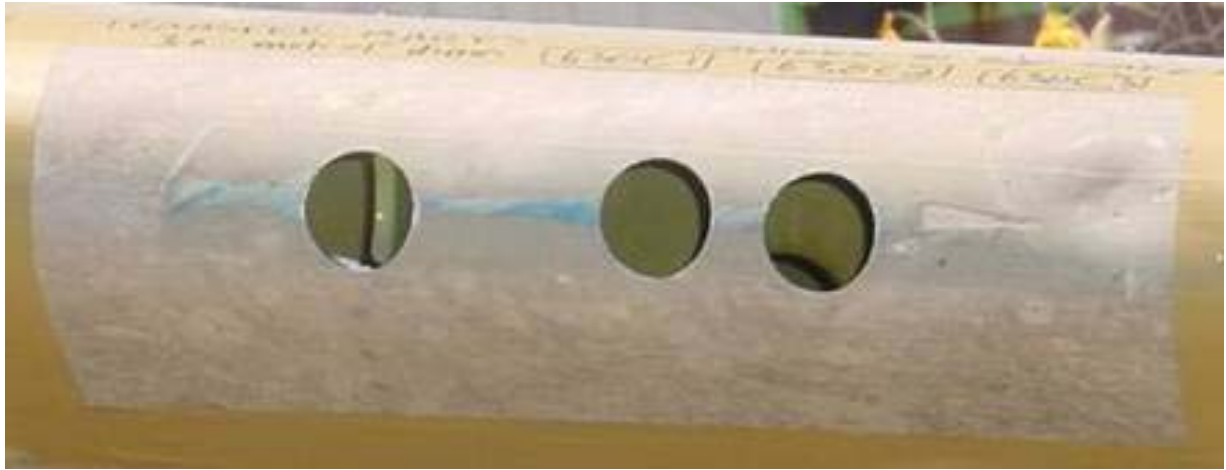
Enlarged image of the transfer marks showing that they end at the edge of the coating.
